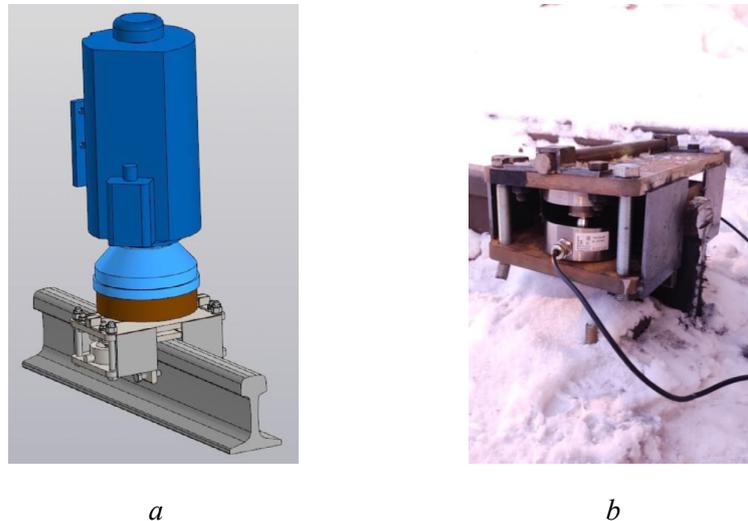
Device for calibrating the pressing force of grinding wheel to rail:
